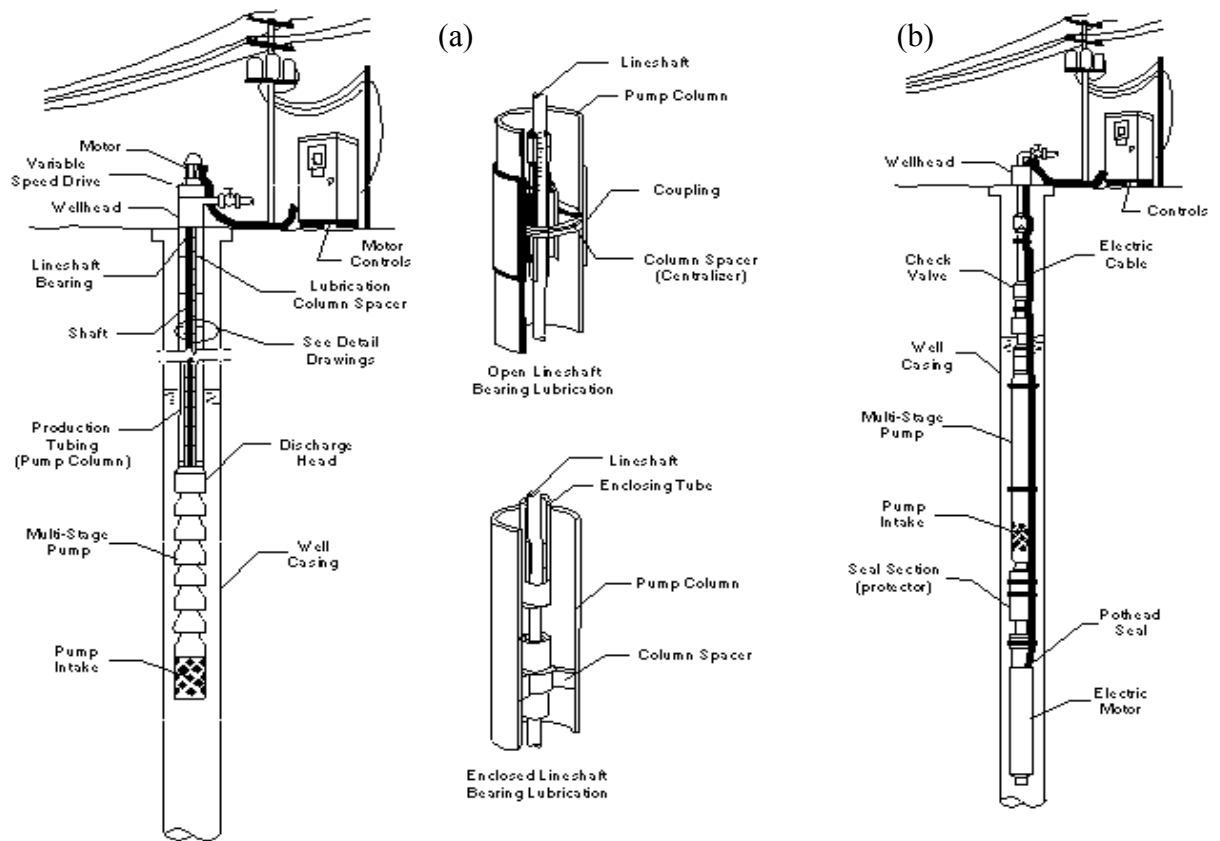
Downhole pumps: (a) lineshaft pump details, and (b) submersible pump details.
